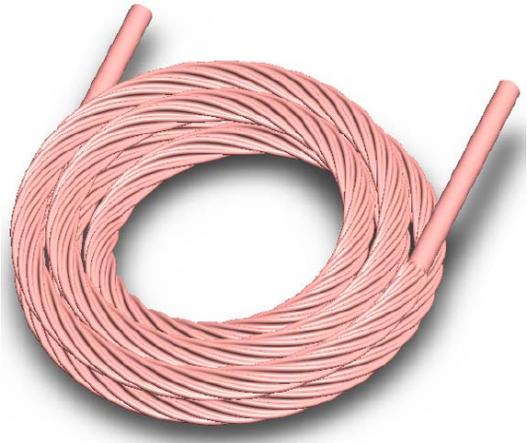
Shape of twisted inner tube in coaxial heat exchanger.
